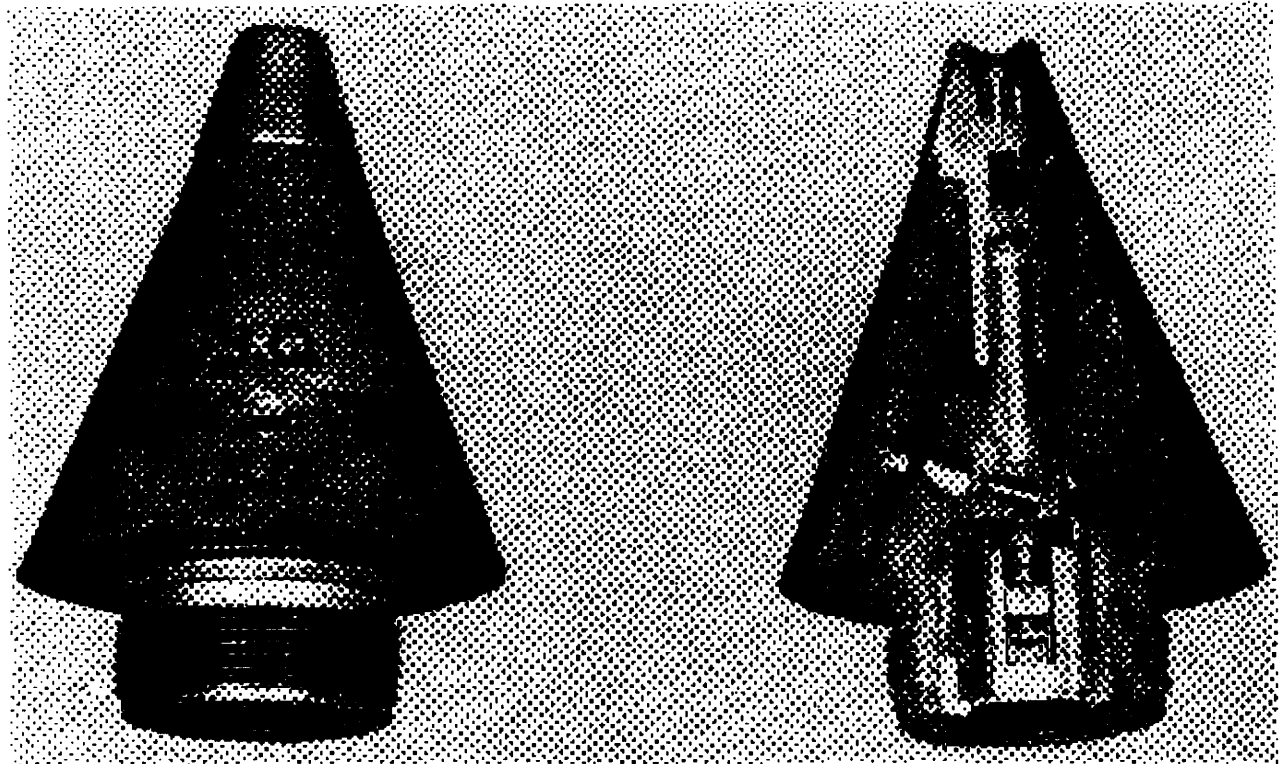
View of Fuze Mk 100 Mod 2 Showing Sleeve in DELAY-DELAY Position and Cutaway View Showing Delay Mechanism in Base.
